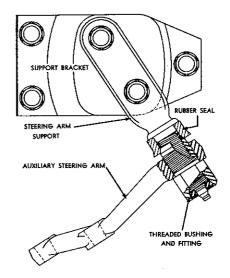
Construction of the Champion Auxiliary Steering Arm
